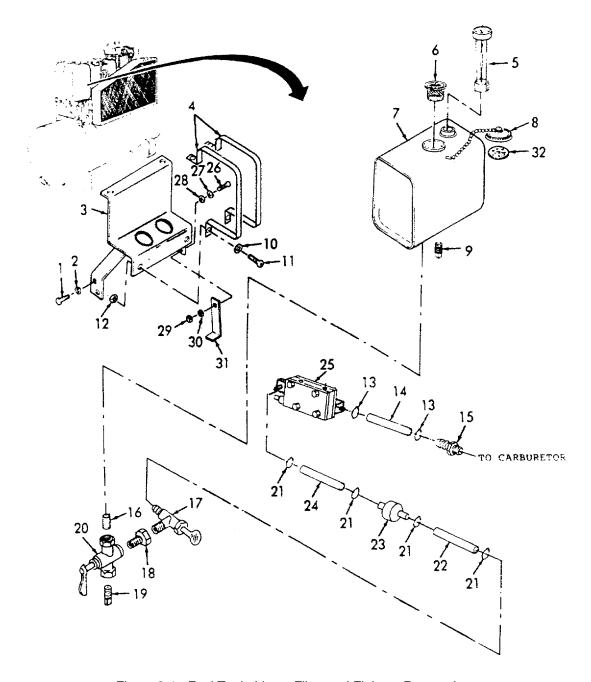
Fuel Tank, Lines, Filter and Fittings, Removal.
